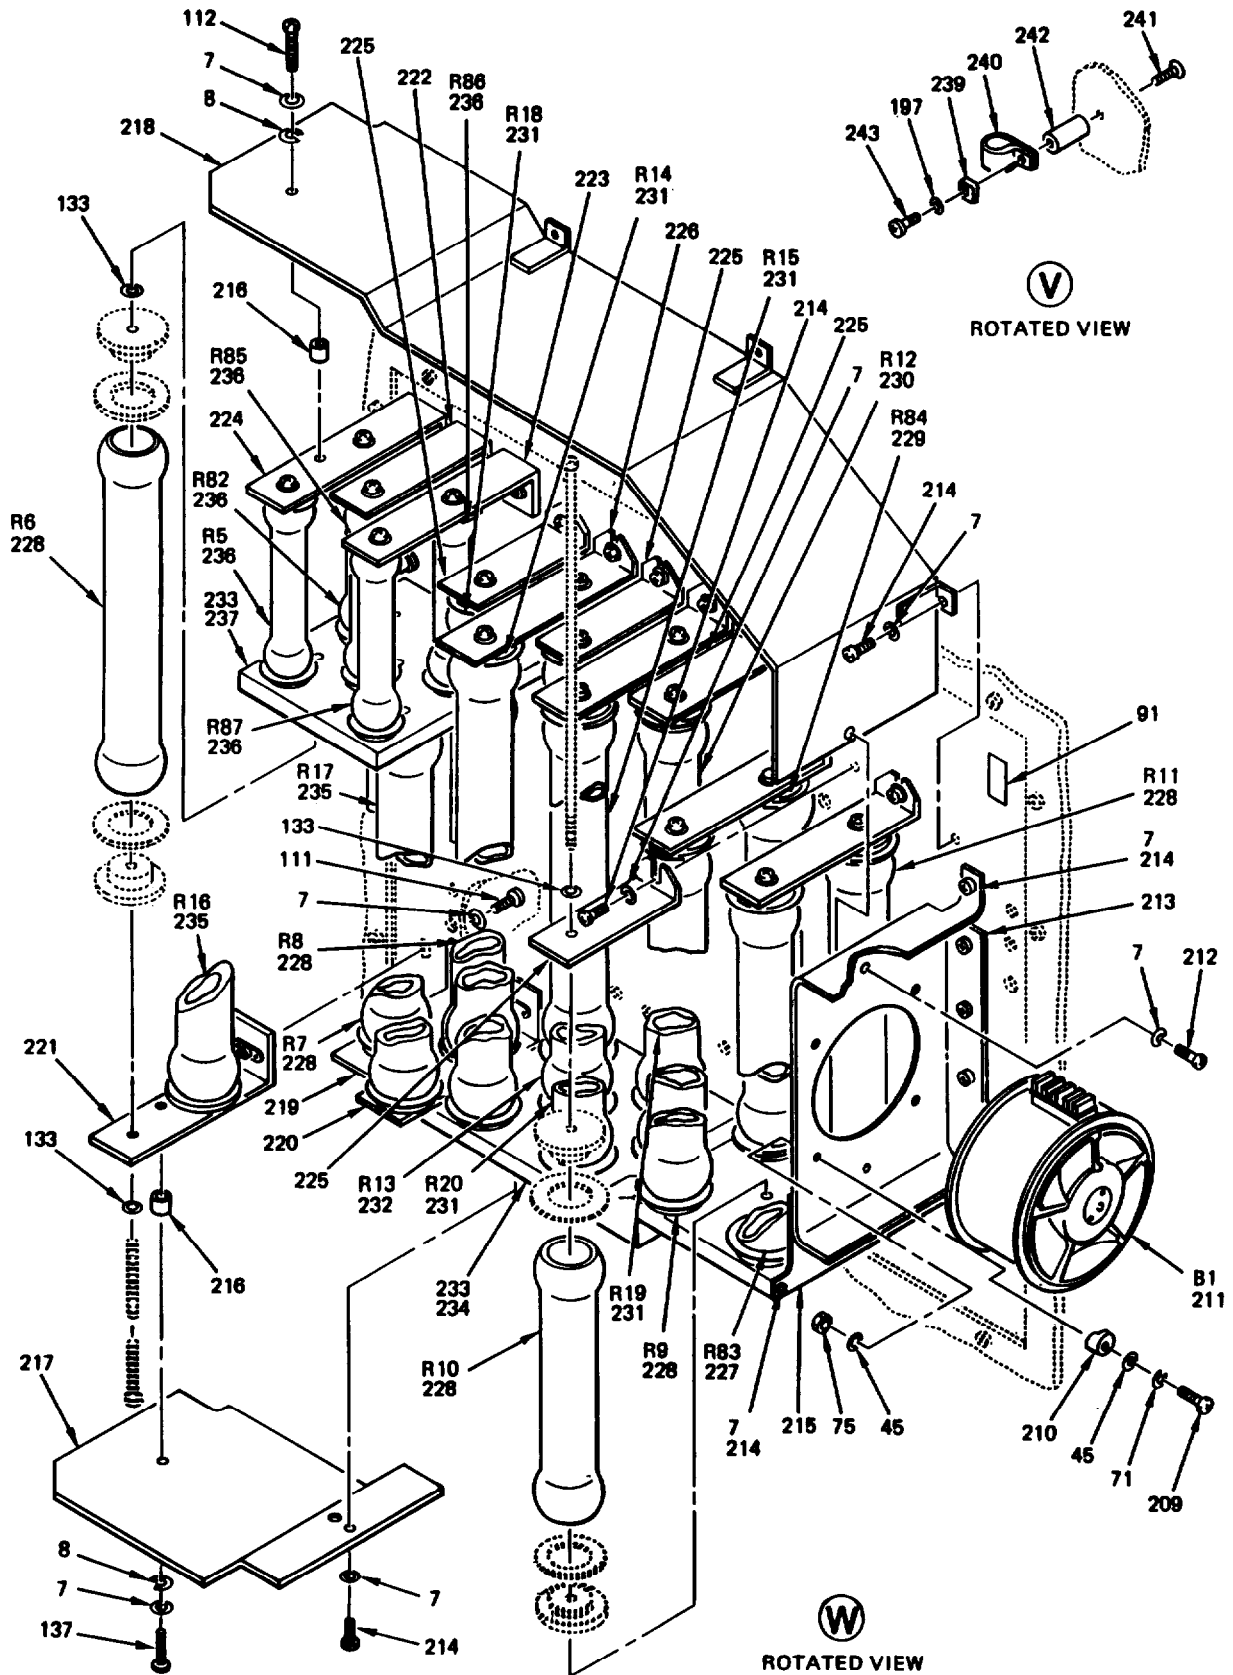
Power Supply Test Set Exploded View (Sheet 9 of 9)
